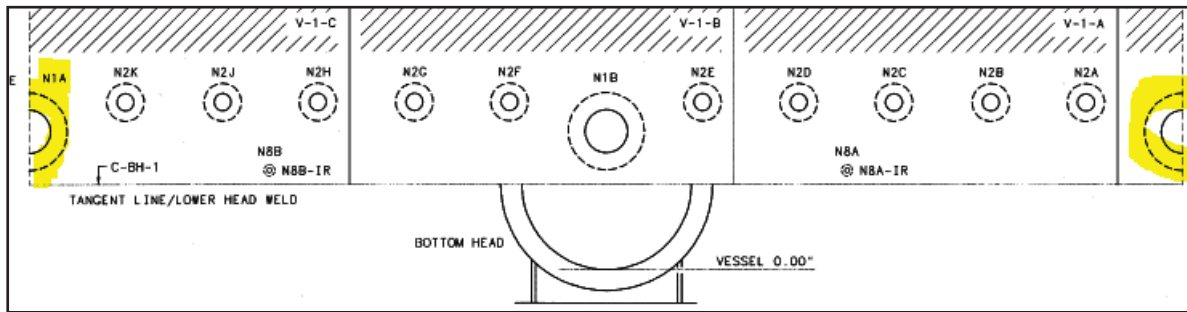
Weld N1A-NV (Extracted from Reference Drawing 1-CHM-0992-C-01)
